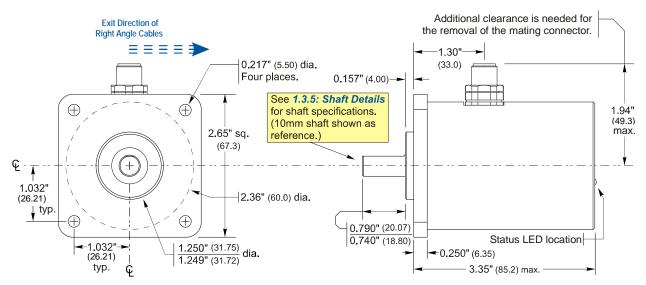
Flange Mount, Side Connector Outline Drawing
